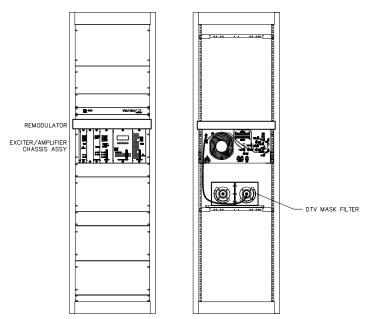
Translator Front and Rear View Reconnection Drawing
